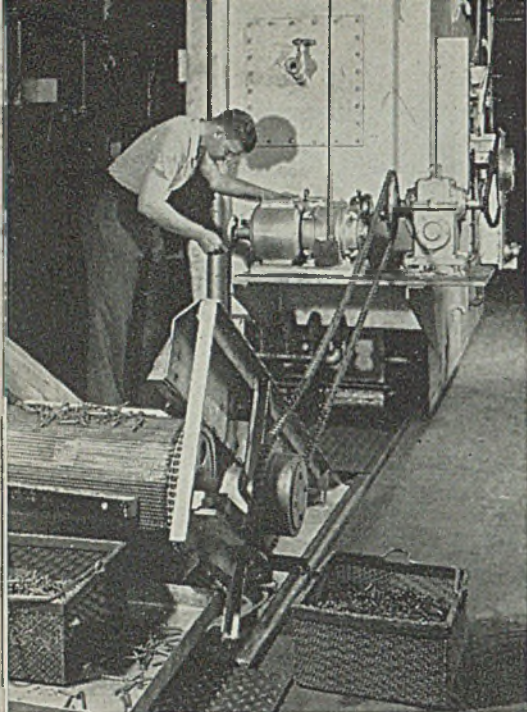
Newest type of controlled-atmosphere continuous-conveyor type furnace for heat treating aircraft bolts and screws. Furnace discharges continuously into quench and separate conveyor removes parts from quench automatically
